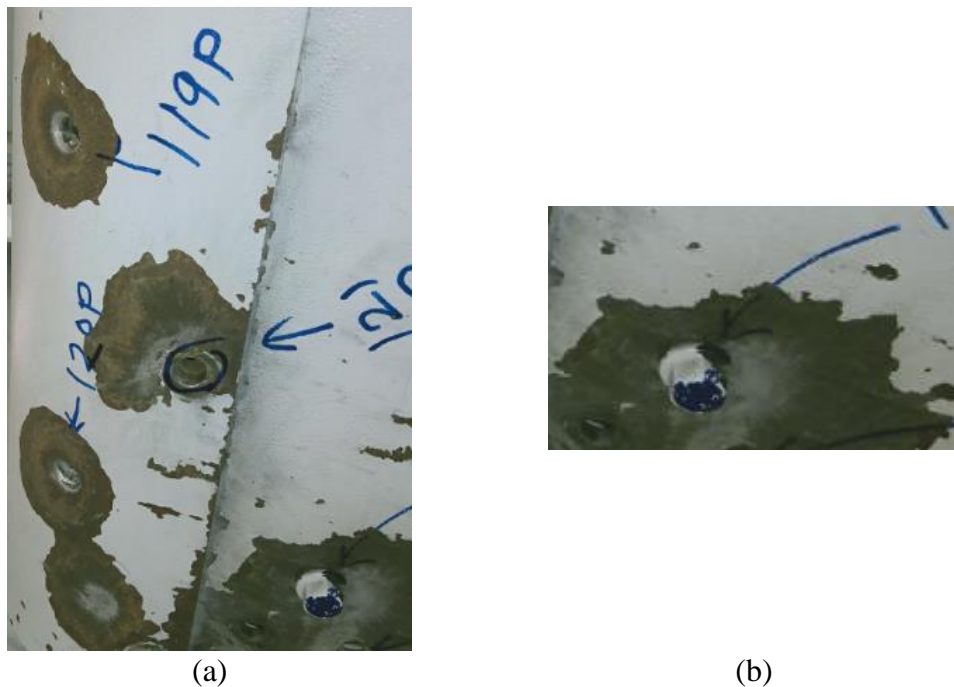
(a) Bend portion of the perimeter protection assembly and (b) Flat portion of the perimeter protection assembly
